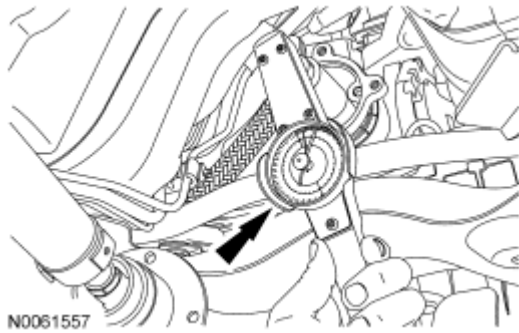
Measuring Rotational Torque Using A Suitable Torque Wrench
